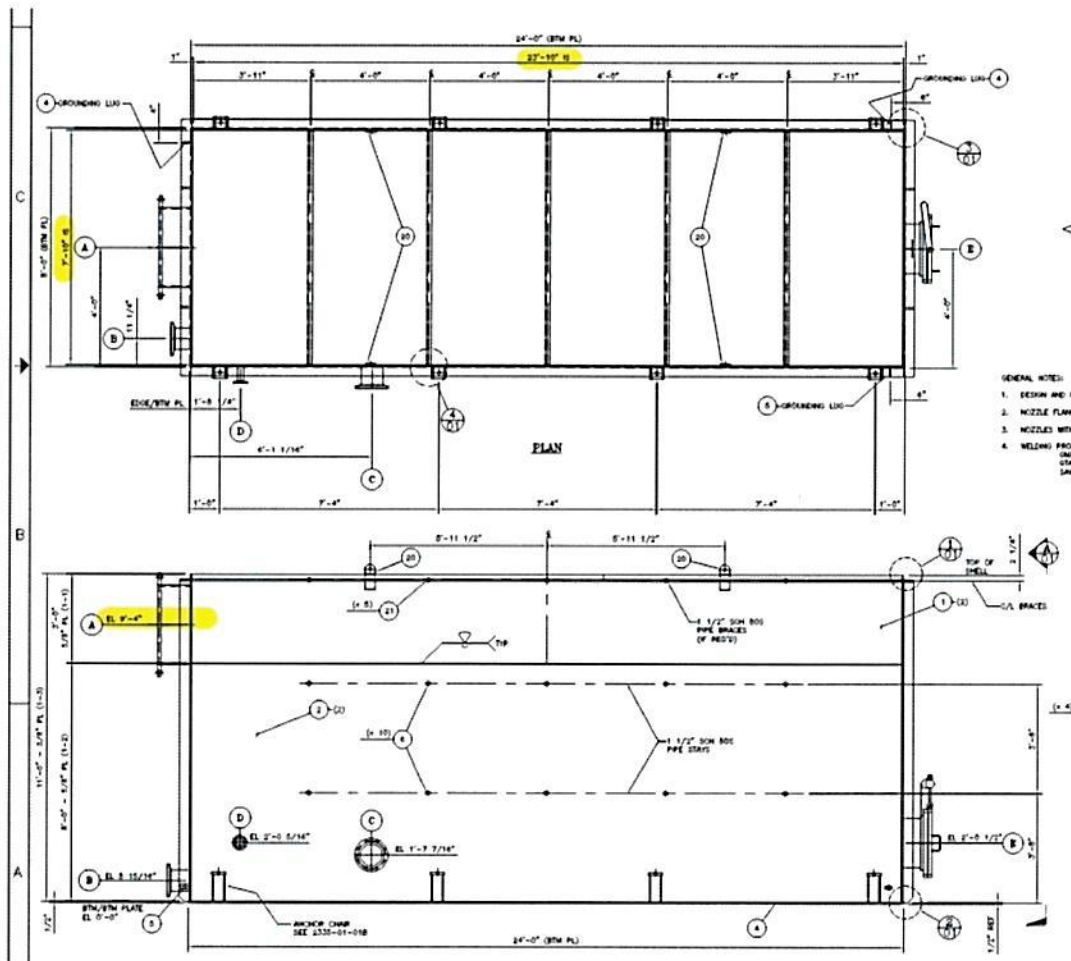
Process Water Tank Plan and Elevation (ref Drawing TVA: TNK-88-6003)
